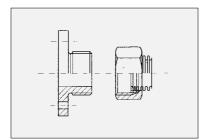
Threaded coupling Threaded insert with threaded flange PN 16–1.4541.
